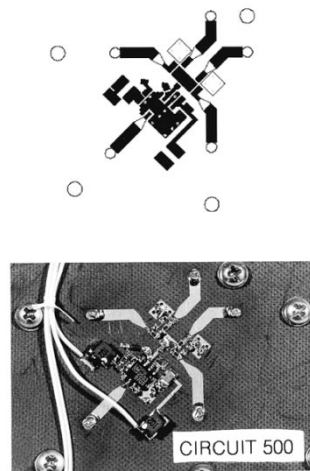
Board layout for one unit cell and the assembled oscillator circuit.
